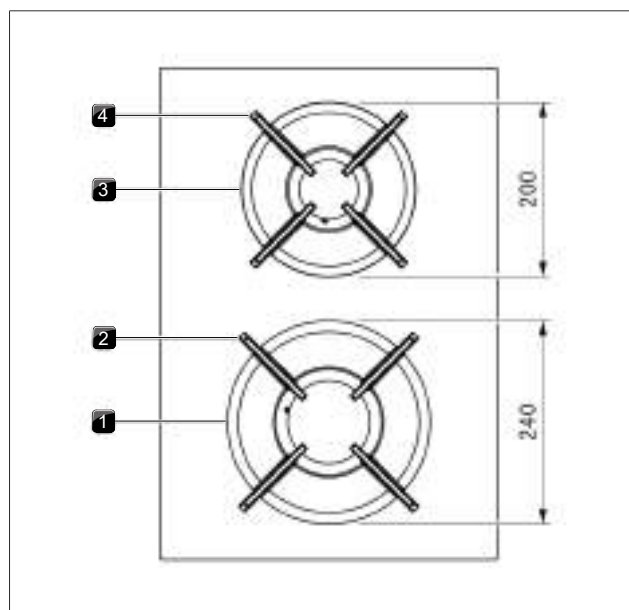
Layout of gas cooktop PKG3 and cooking zone dimensions
